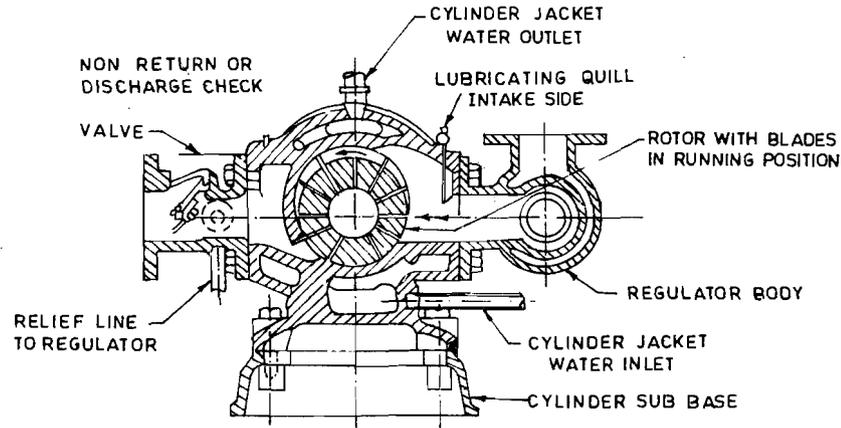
Sectional End View of a Sliding Vane Rotary Compressor
